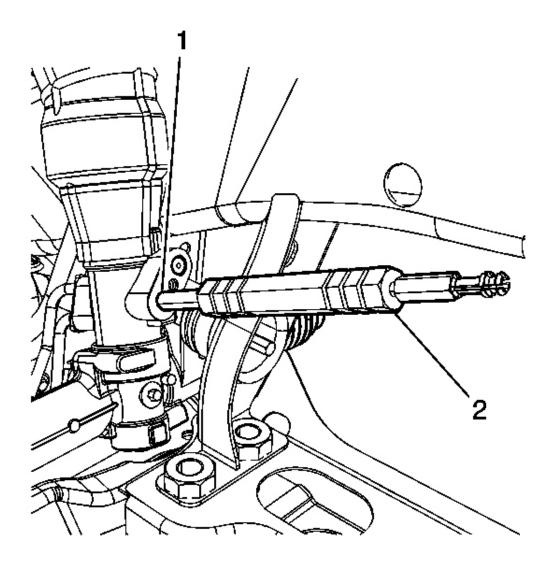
Identifying Steering Gear Oil Seal Installer End Of J 44586 Courtesy of GENERAL MOTORS CORP.
